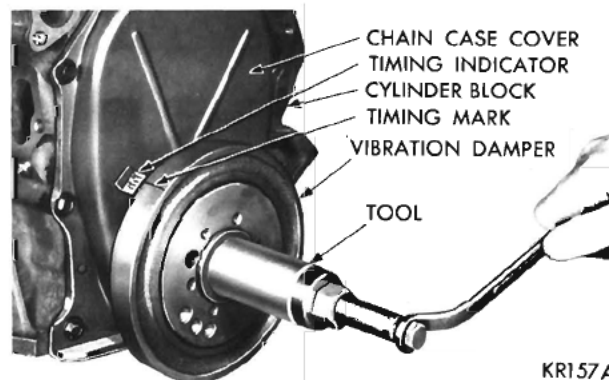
Installing Vibration Damper Assembly Tool C-3688
